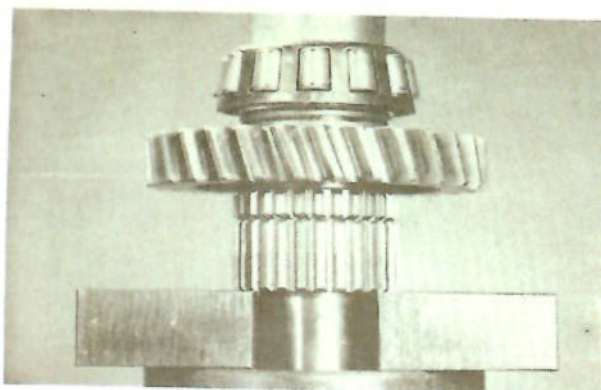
INSTALLING THE CONE OF FRONT TAPERED ROLLER BEARING ON THE OVERDRIVE INPUT SHAFT.
